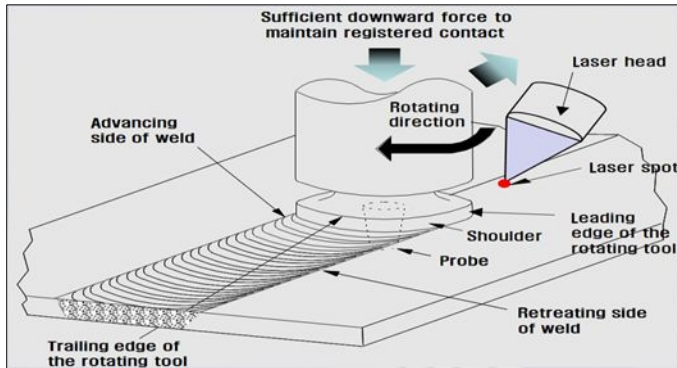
Schematic of Laser assisted Friction Stir Welding
